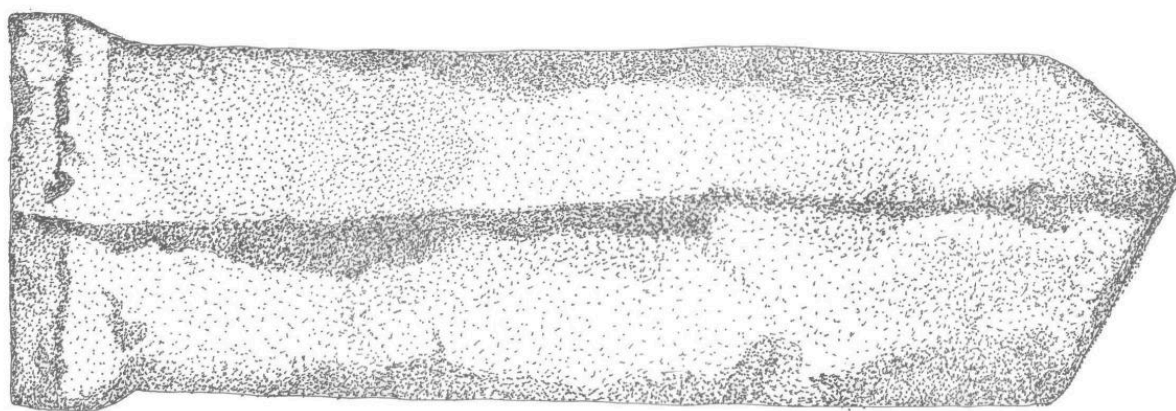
LARGER, HEAVIER HAMMER WITH A WEDGE-SHAPED FACE USED FOR FORGING.
